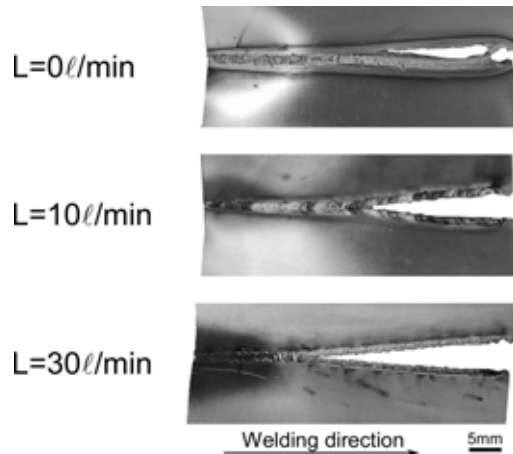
Appearance of crack after cracking test. (P=2.5kN, V=600mm/min)
